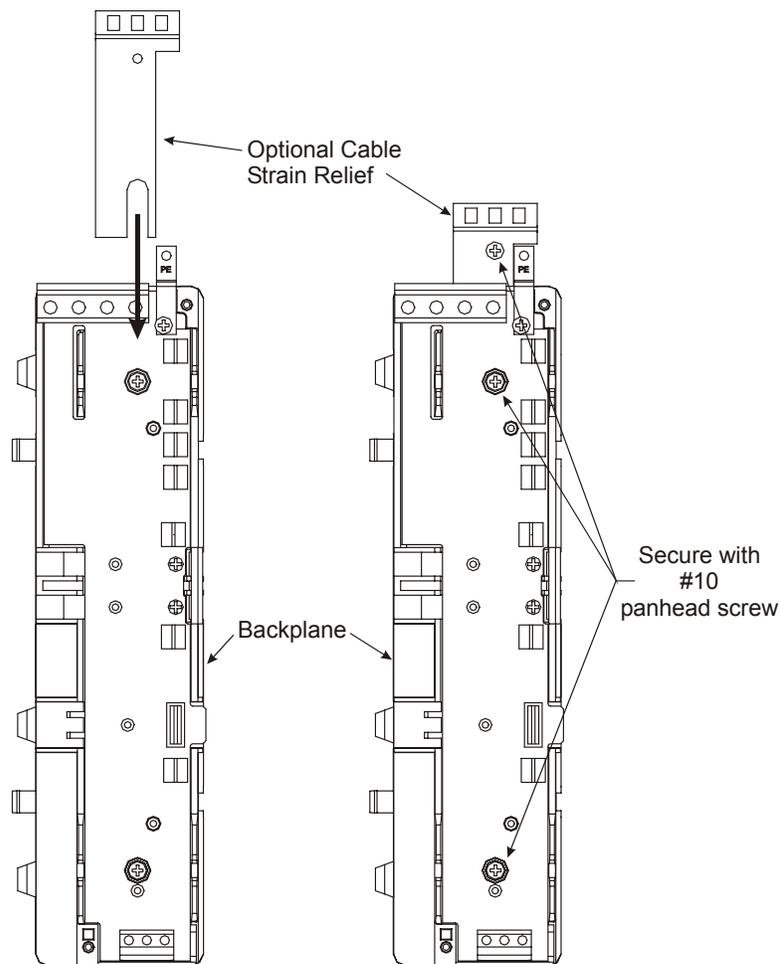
MP-5000 Power Module Backplane shown with Optional Cable Strain Relief Bracket Mounting
